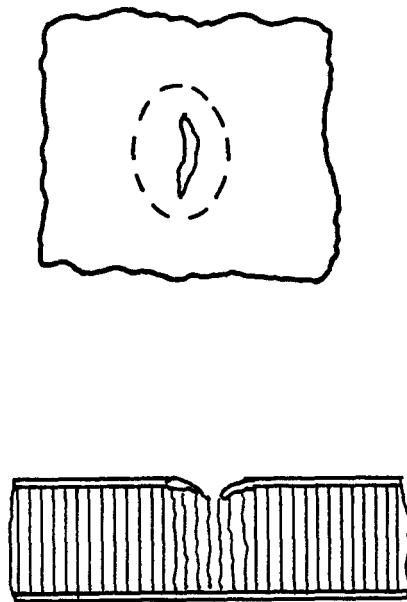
Damaged Honeycomb Core Panel, 2-8 Inch Damage - One Skin and Core
